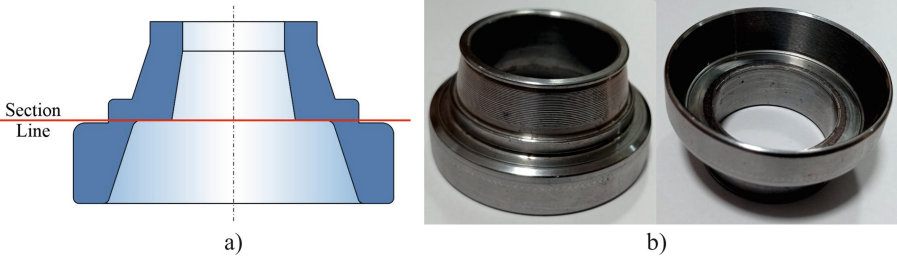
The continuous design of the workpiece of two rings: a) scheme; b) prototype.
